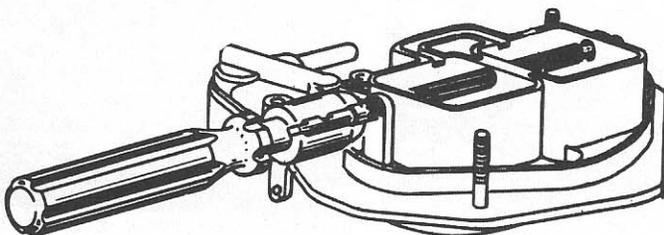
Reaming the choke shaft bore (Sec 6)
